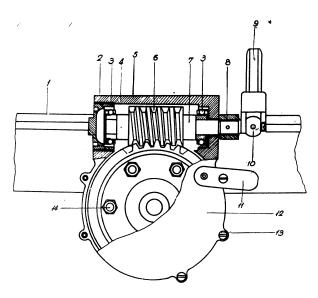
BARREL ELEVATING MECHANISM ASSEMBLY
